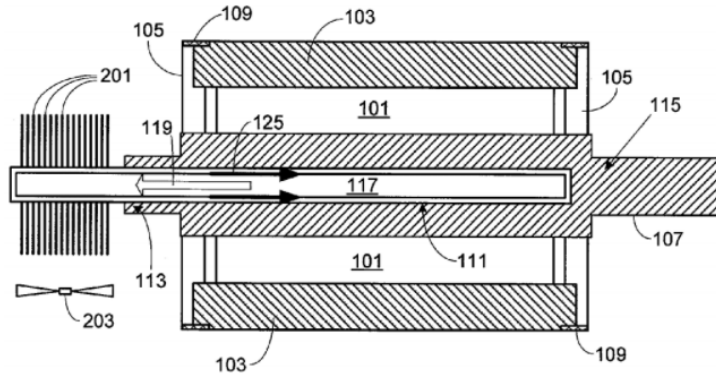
Rotor cooling set-up including heat pipes [129]
